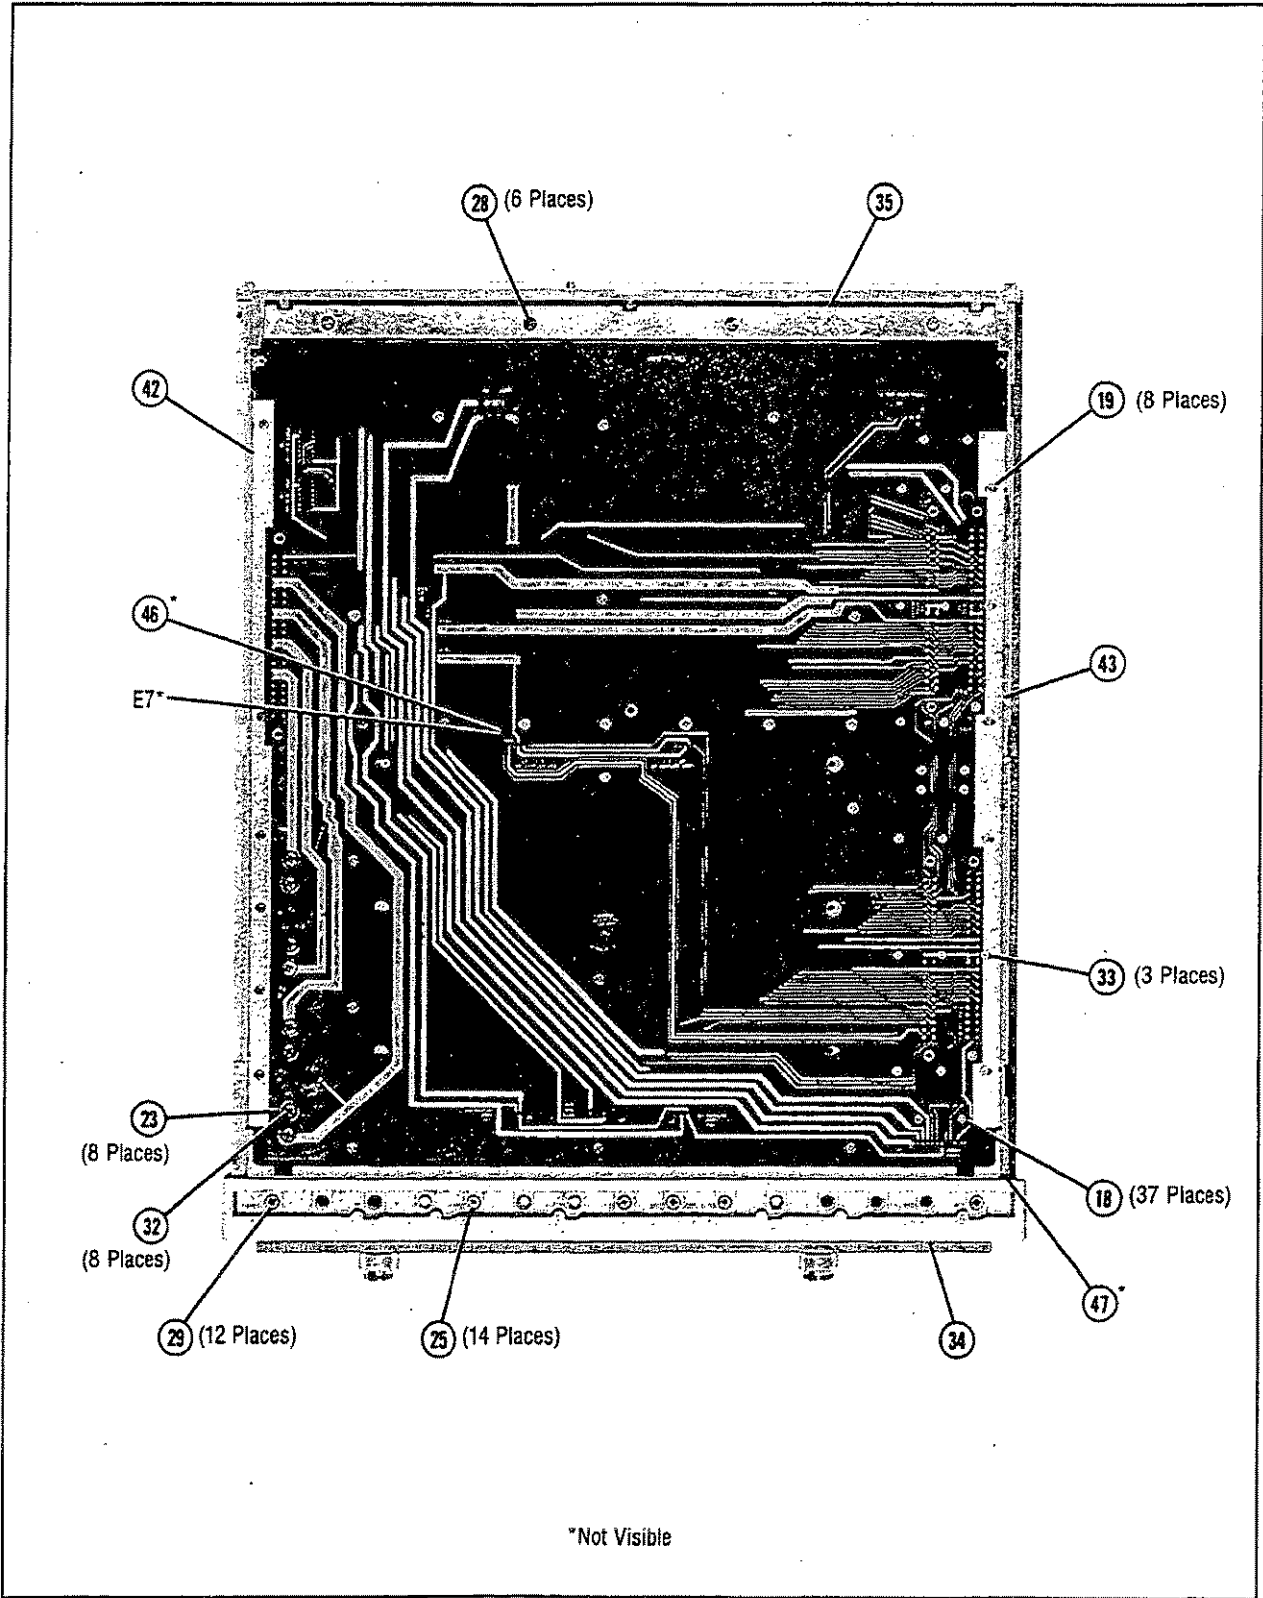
HP 8513A Miscellaneous Mechanical, Chassis, and Electrical Parts (3 of 5)
